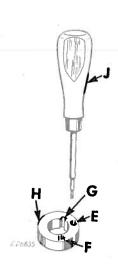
Feed Eccentric Extractor 164203 and Eccentric 164915, bronze
